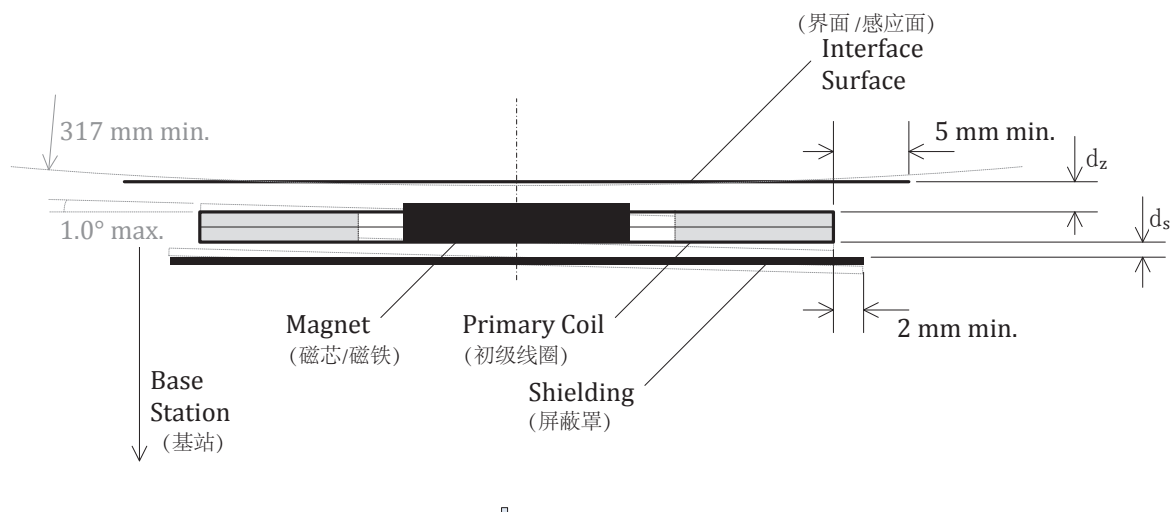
Primary Coil assembly of Power Transmitter design A1
